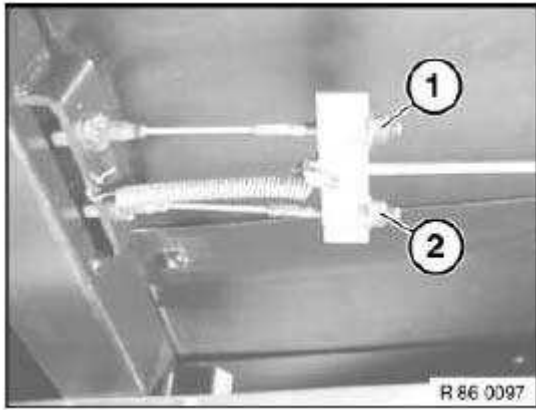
Identifying Depending On Road Wheel Side, Nut
